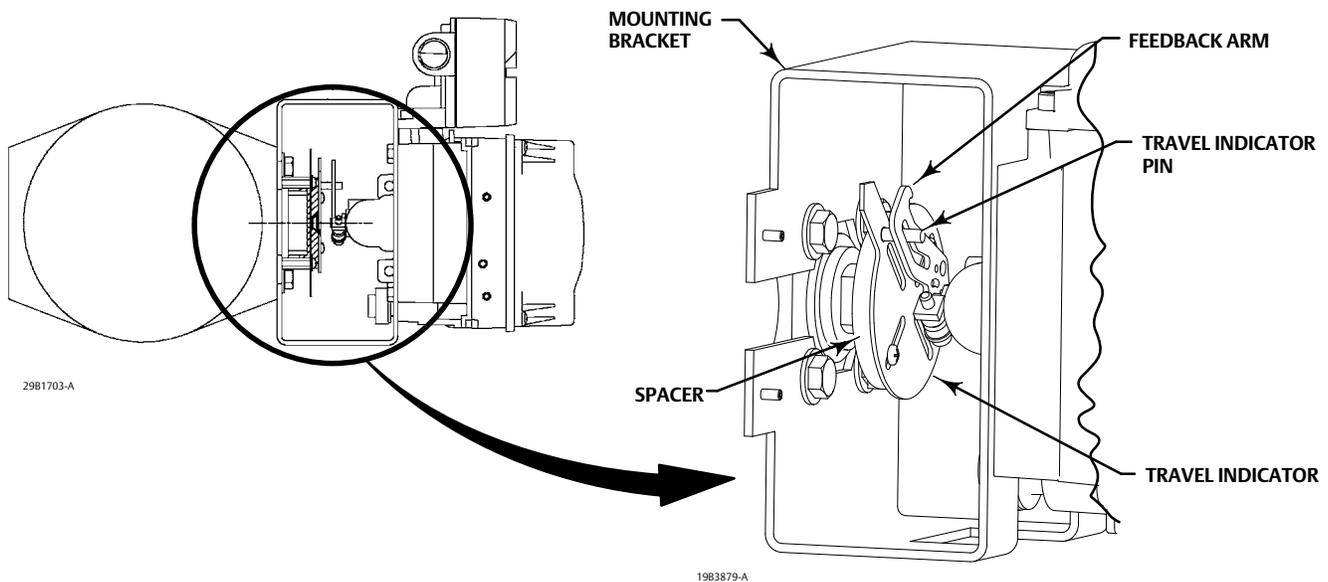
shows the DVC6030 SIS digital valve controller mounted on a quarter-turn actuator. Refer to figure 7 for parts locations. Refer to the following guidelines when mounting on quarter-turn actuators:
